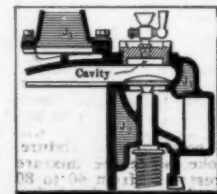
Section of a motor cylinder showing a cavity in the valve cap which will increase compression.
